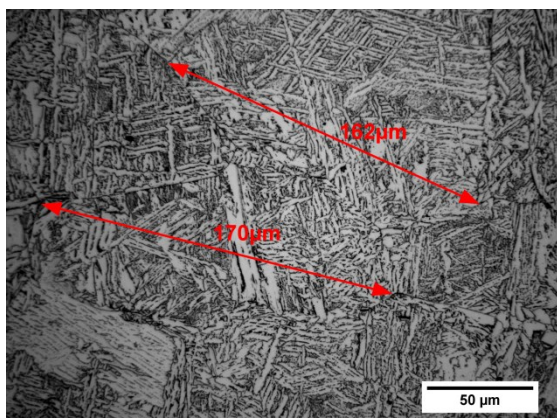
TIG welded sample 3.5.2-8. Maximum diameter of grain is 170 µm.
